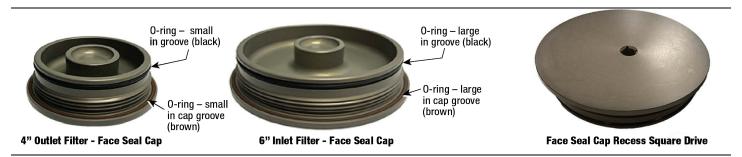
O-Ring Locations for Face Seal Cap w/Recessed Square Drive
